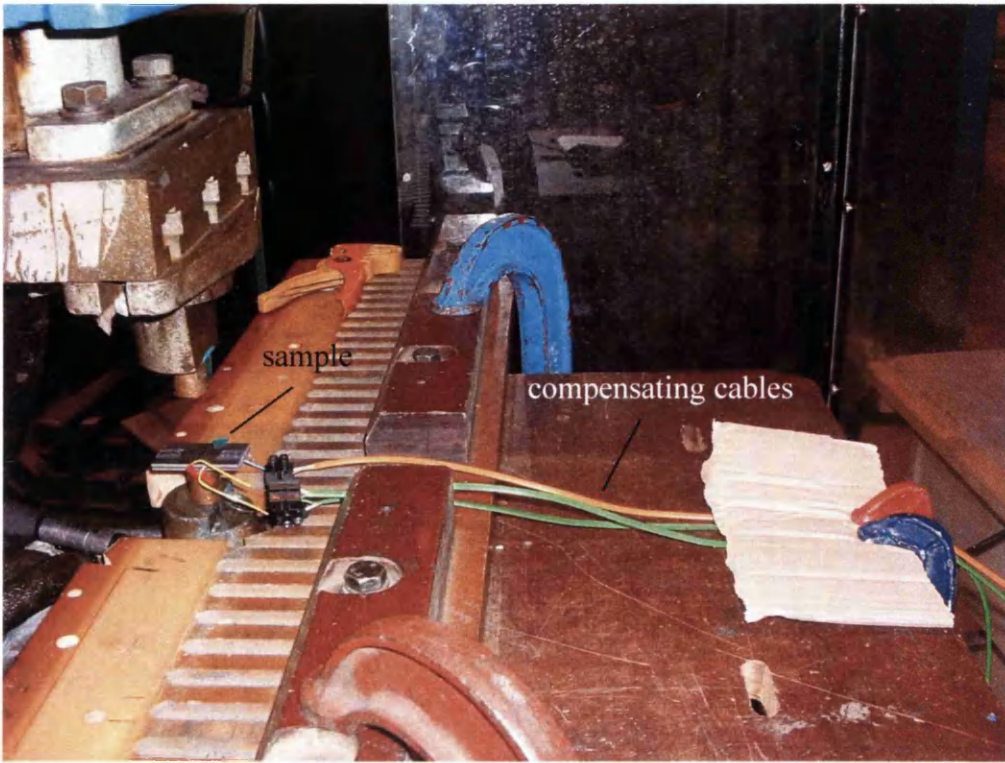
Detailed photograph of the weld test specimen and compensating cables.
